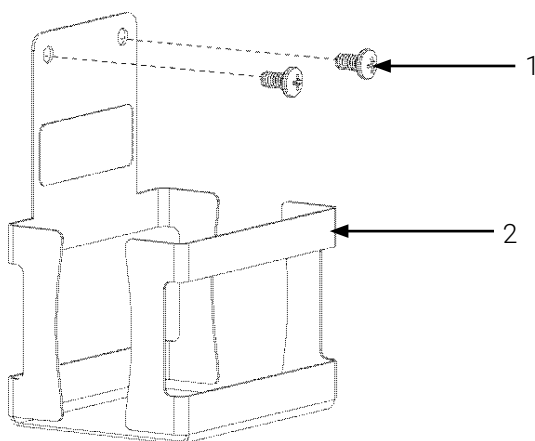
Installation of the gas cylinder mounting bracket (top part)
